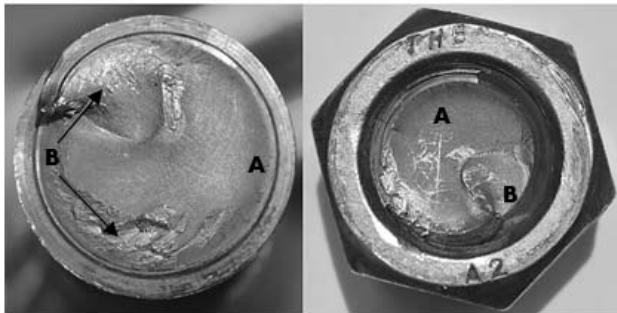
View of the fatigue fracture region of the B1 shaft - Model A3300
